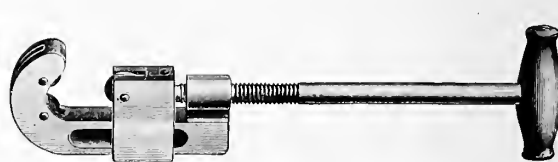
BARNES 3-WHEEL PIPE CUTTER.
